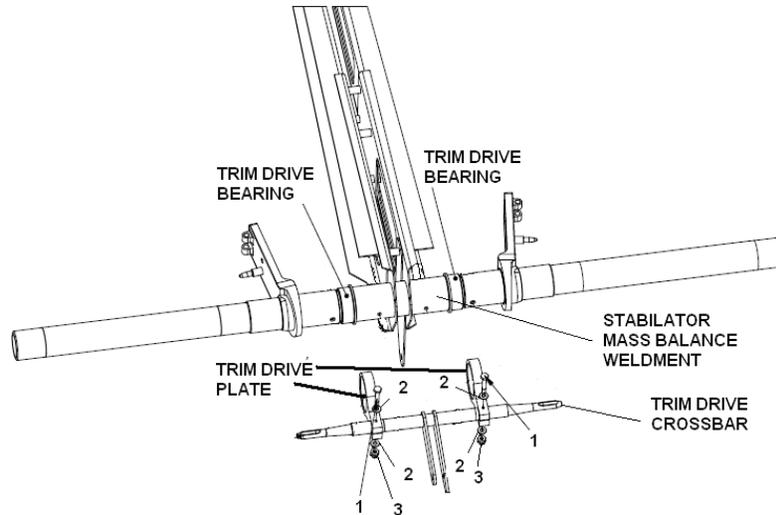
Stabilator Mass Balance Weldment
